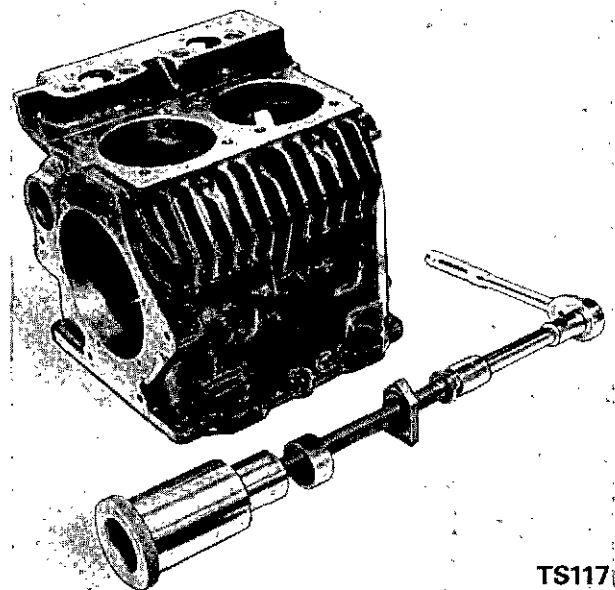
Removing Flywheel End Camshaft Bush.
